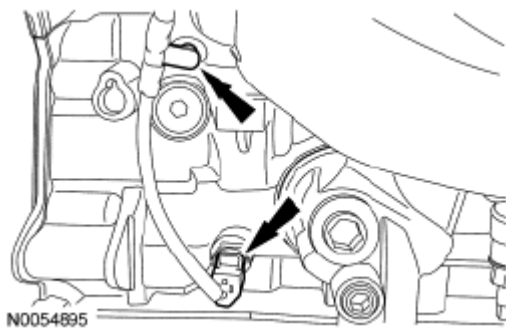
Locating Engine Oil Pressure (EOP) Switch Electrical Connector & Wiring Harness Pin-Type Retainer
